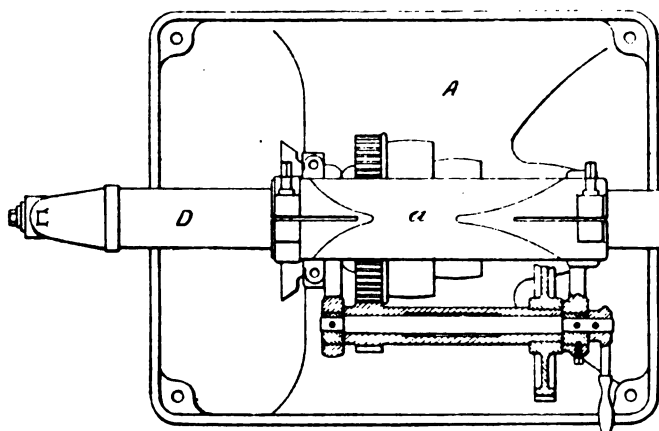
Plan, and Part Section of Pillar and Knee Machine.
